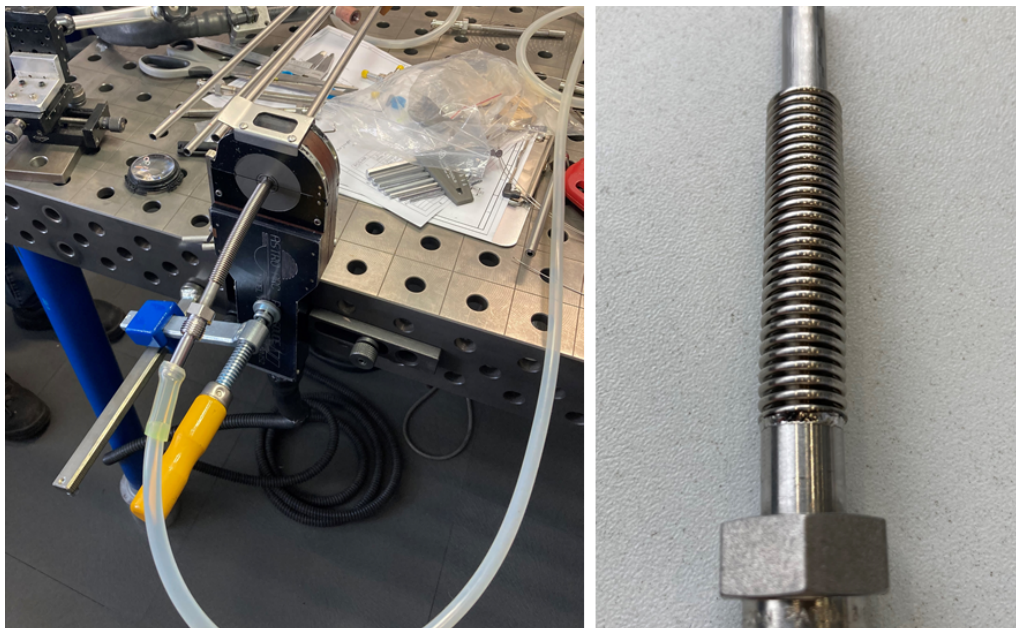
Orbital welding machine (left) and laser welding connection between a rigid and a flexible stainless-steel tube (right).
